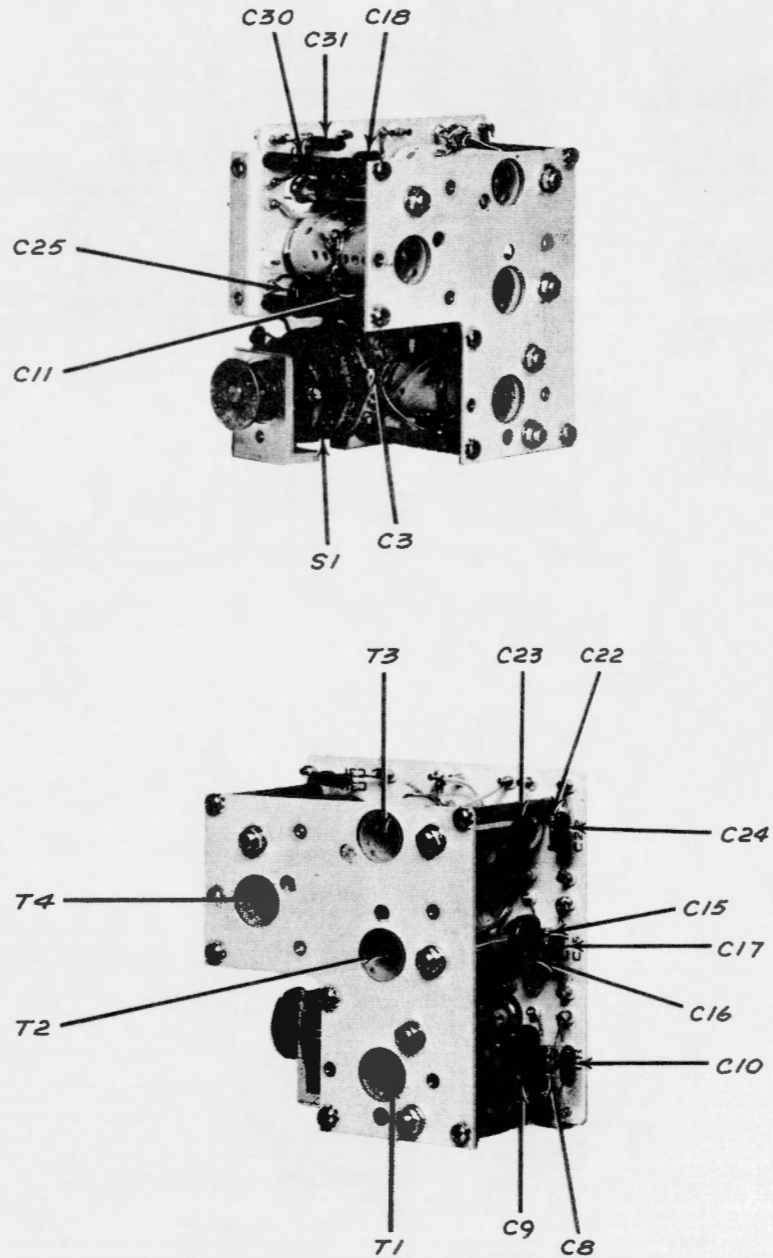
High-Frequency Oscillator A1A8, Parts Location and Test Points, Disassembled
